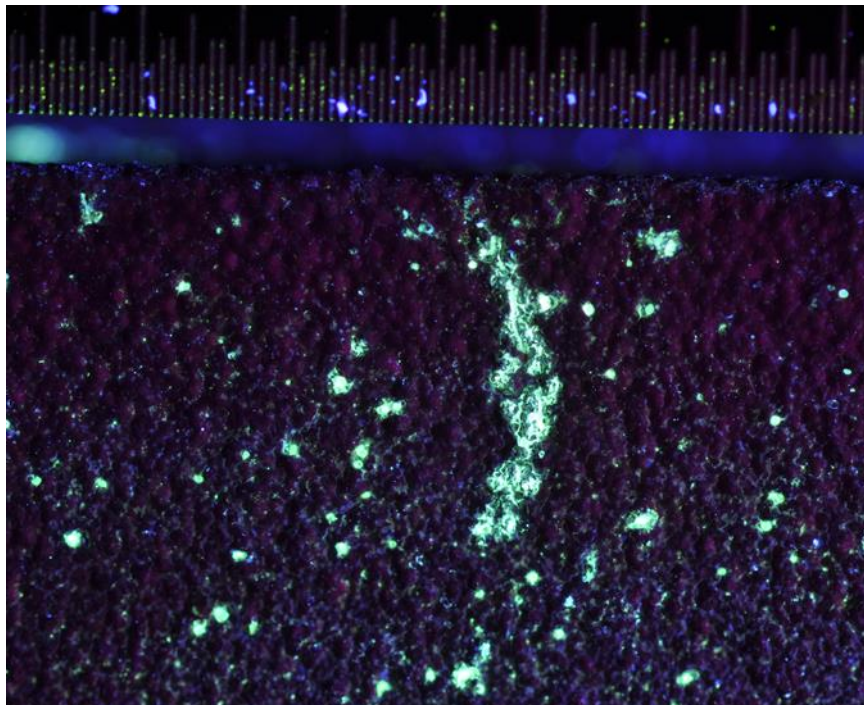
25° Bottom (7) FPI Test Specimen Zoomed In
